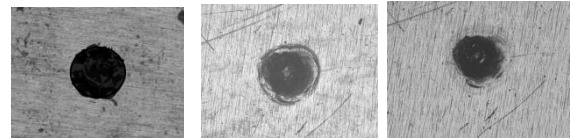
(a) hole drilled by μECM process. (b) hole drilled by μECDM process. (c) μECDM hole finished by μECM sequentially.
